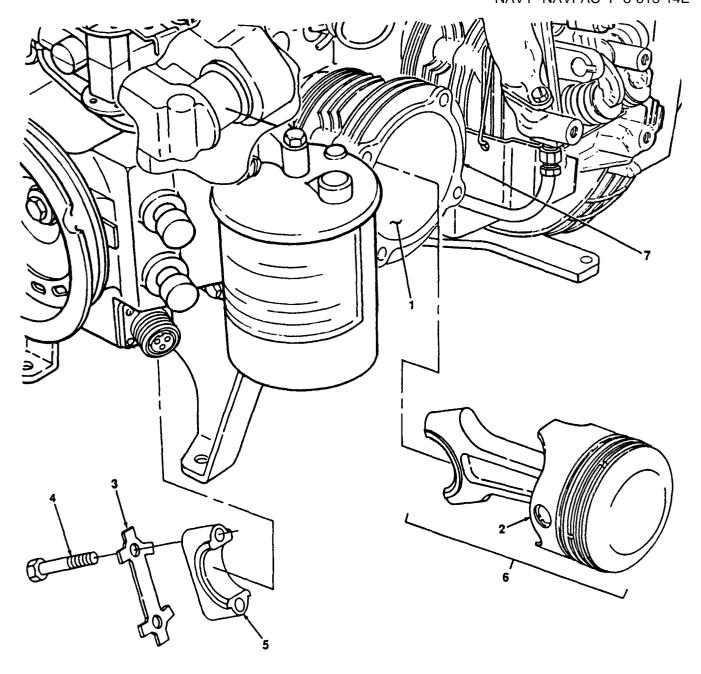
Piston and Connecting Rod Assembly, Removal.
